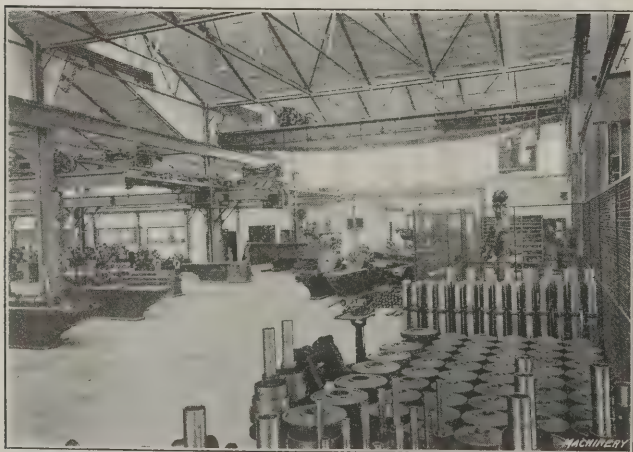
Main Bay showing the Five- and Ten-ton Cranes
